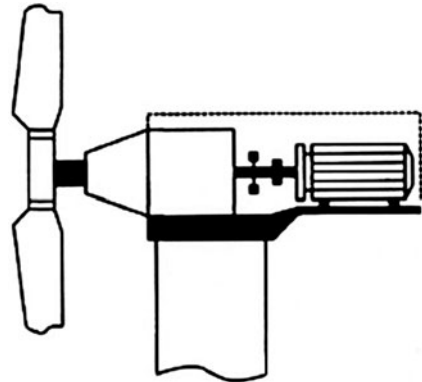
Drivetrain layout incorporating a three-point suspension, with one rotor shaft bearing integrated into the gearbox, from [28]
